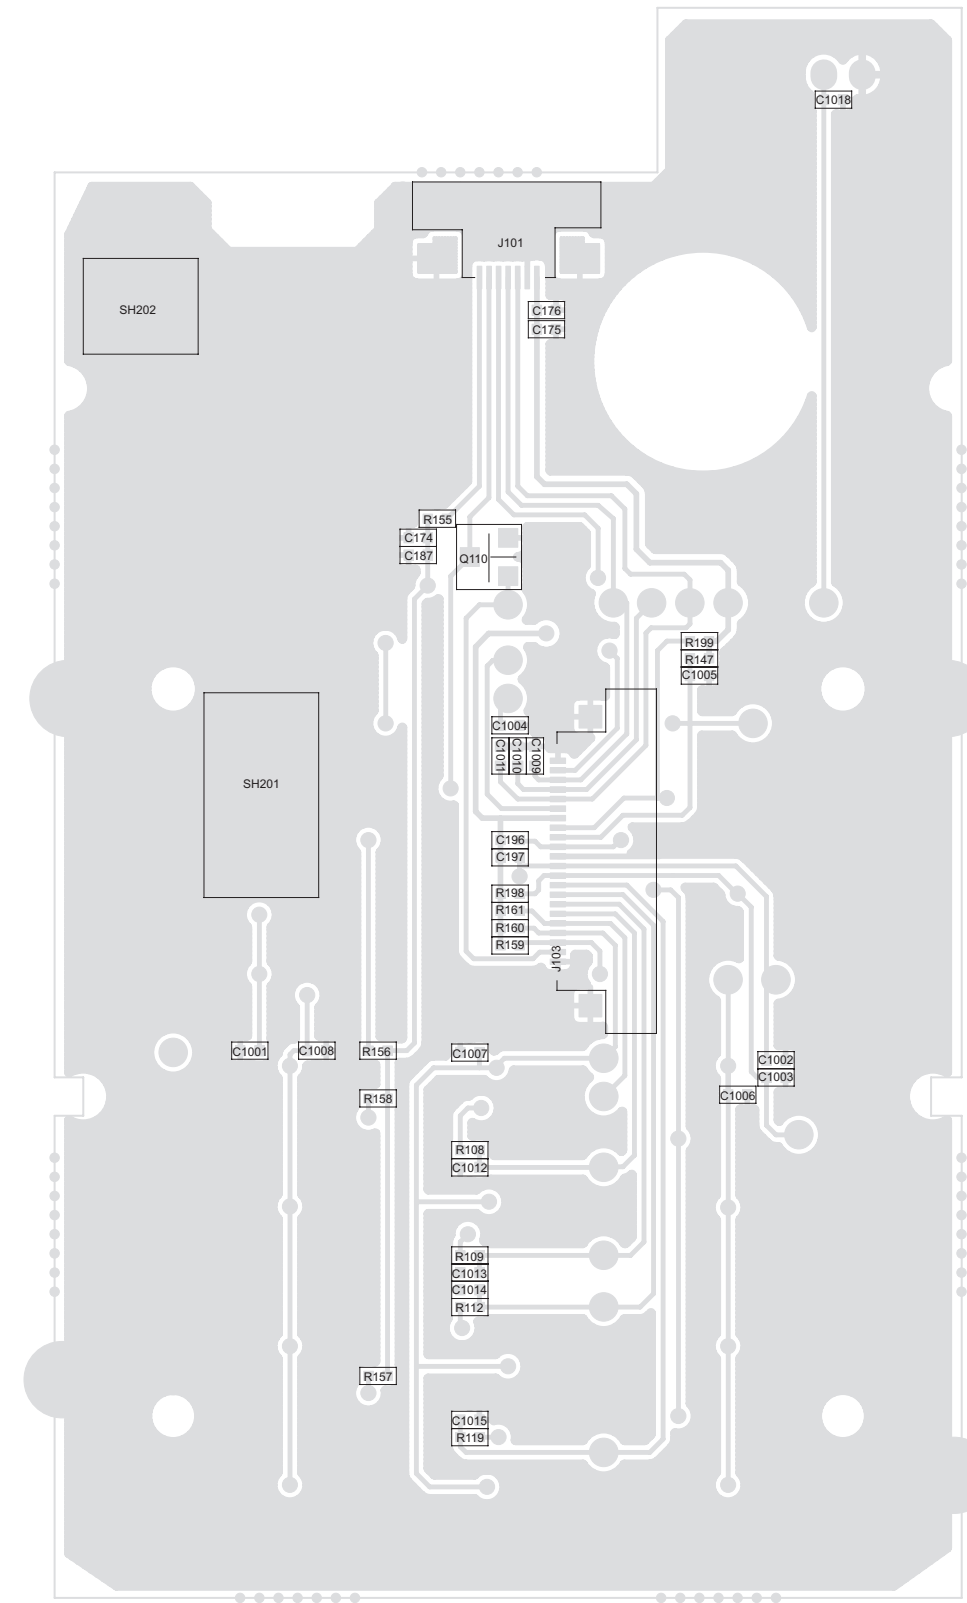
UHF2 (435–480 MHz) Keypad Board: PCB No. E11-000886-00
